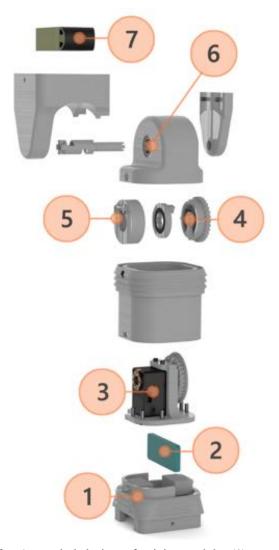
An exploded view of a joint module. (1) screw-less assembly mechanism; (2) micro-controller; (3) actuator; (4) elastic gear; (5) rotary encoder; (6) bearing; (7) battery-pack.
